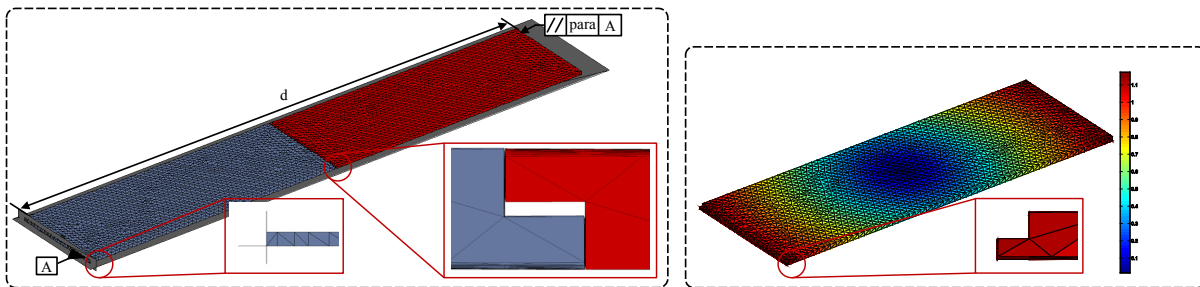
Assembly of two Injection Molding Parts considering Shrinkage and Warpage
